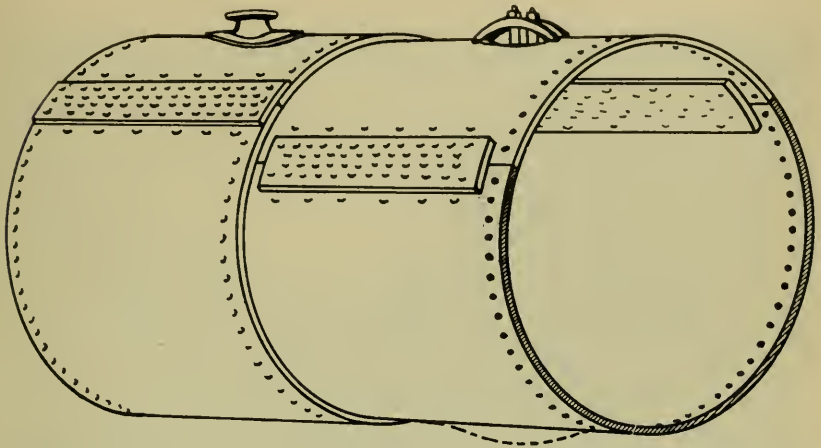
Repair of a bulge caused by overheating because of an oil deposit on the plate.
